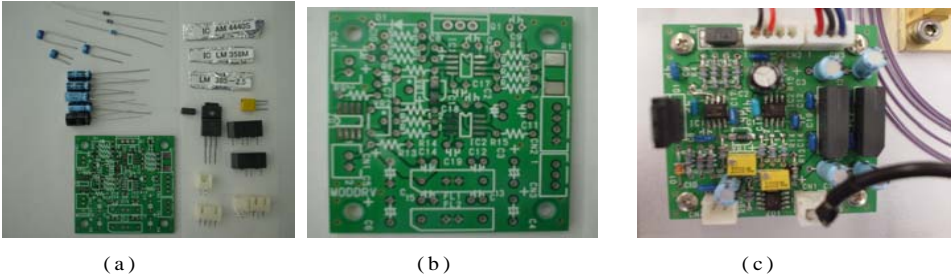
Photographs of (a) electronic components, (b) assembling board of 50mm x 50mm square and (c) assembled LD drive circuit.
